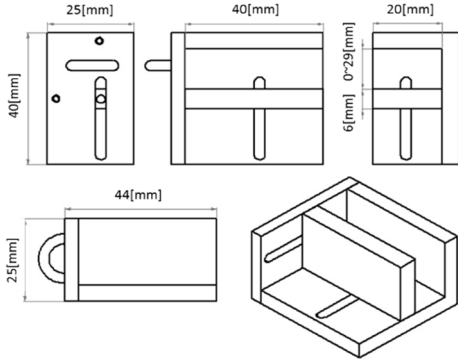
Fixture for the styles shown in Fig. 3 (b) and (c)
